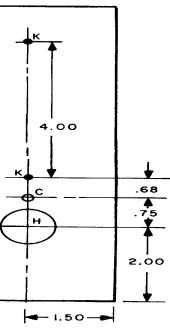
Alarm Monitor Power Supply Test Fixture Top Chassis Layout.
